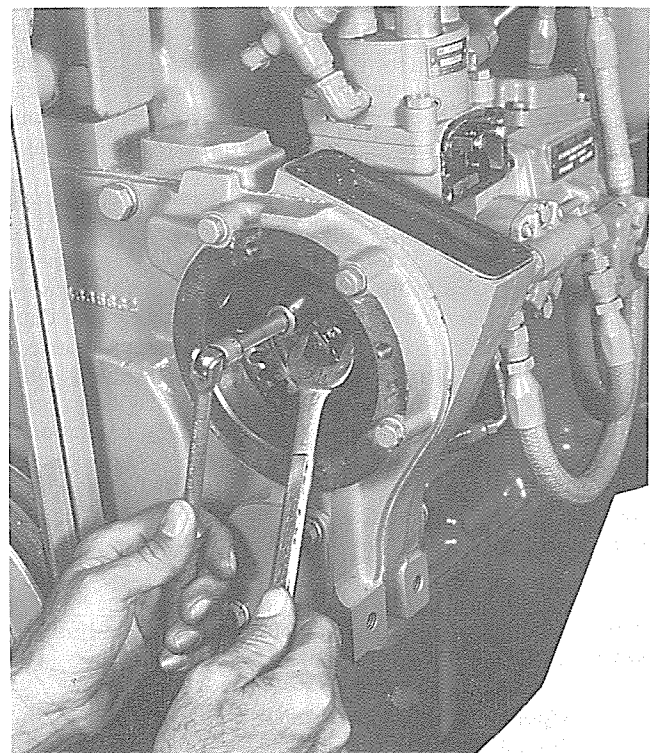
Aligning Timing Mark on Pump Drive Gear Hub With Timing Pointer and Tightening Gear Attaching Capscrews (Engines Without Fan Drive Pulley)
